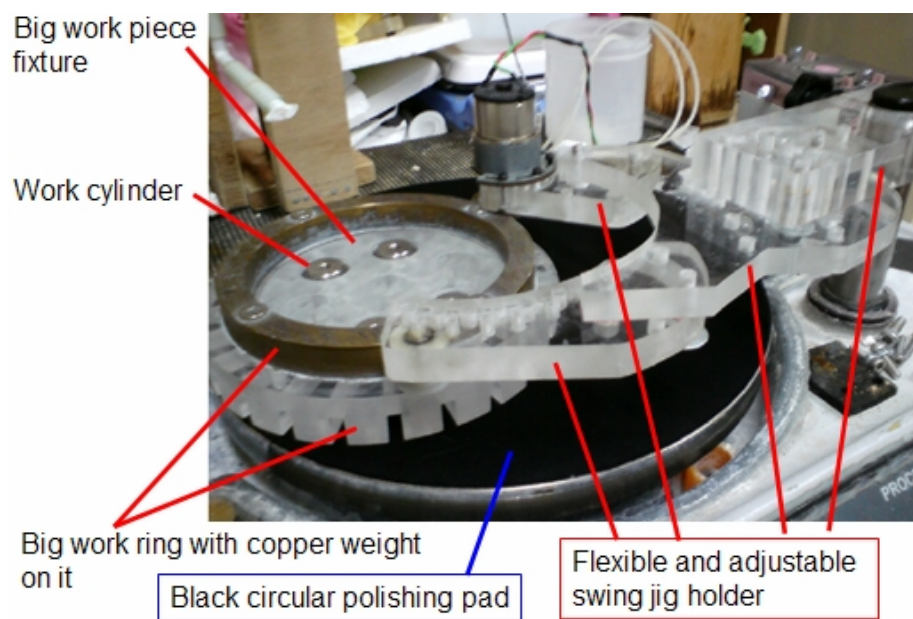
Flexible swing jig works with workpiece fixture of large size for 12-inch soft pad.
